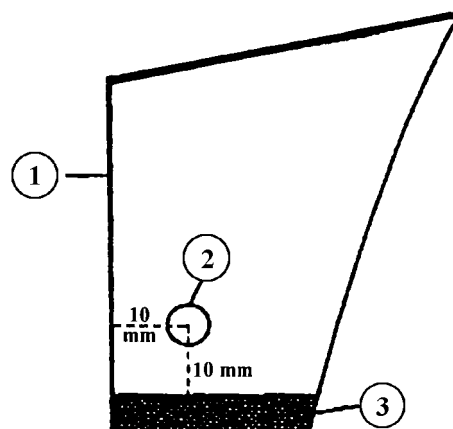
Horizontal hole drilled through a chunky heel for insertion of rod G (Figure 1)
